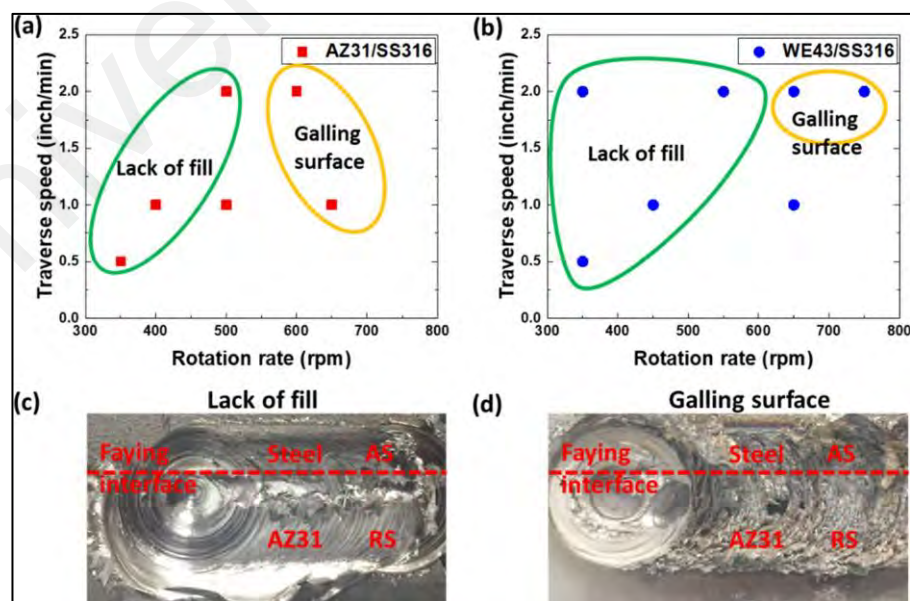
(a) Welding parameters of AZ31 and SS316 steel (b) welding parameters of WE43 and SS316 steel (c,d) corresponding defects under varying process parameters window (Wang et al., 2019)
